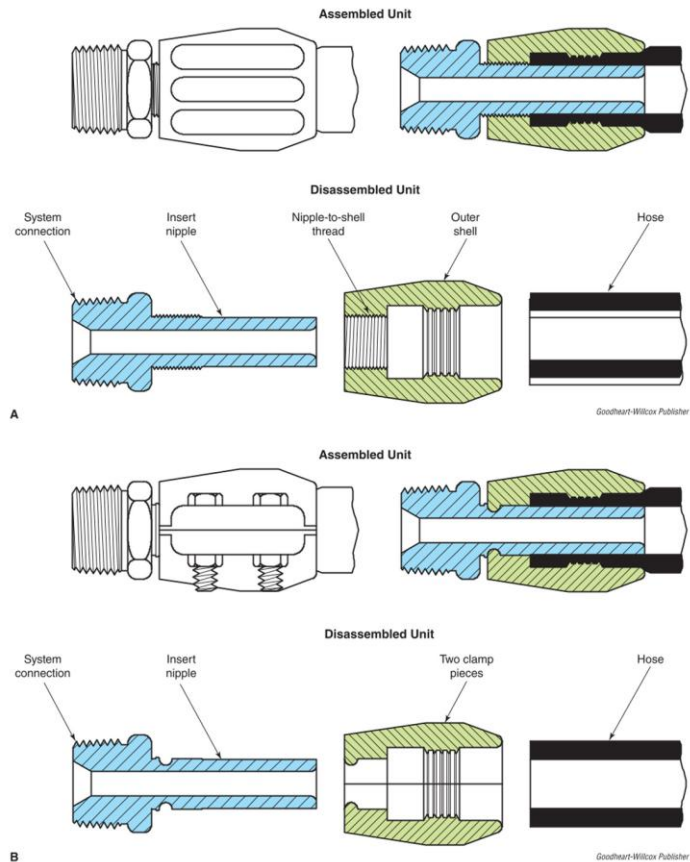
Reusable hose-end fittings are either screw-together or clamp type. A—Screw together. B—Clamp.
